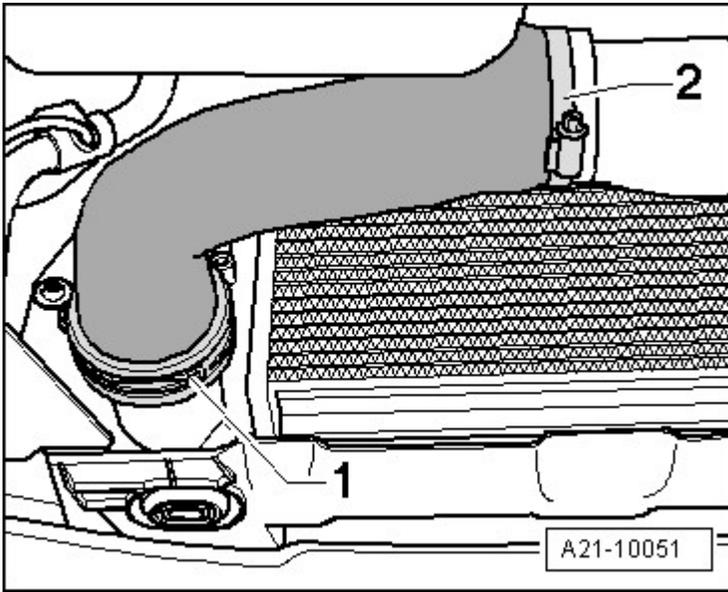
Identifying Air Cooler Air Duct And Clamps
